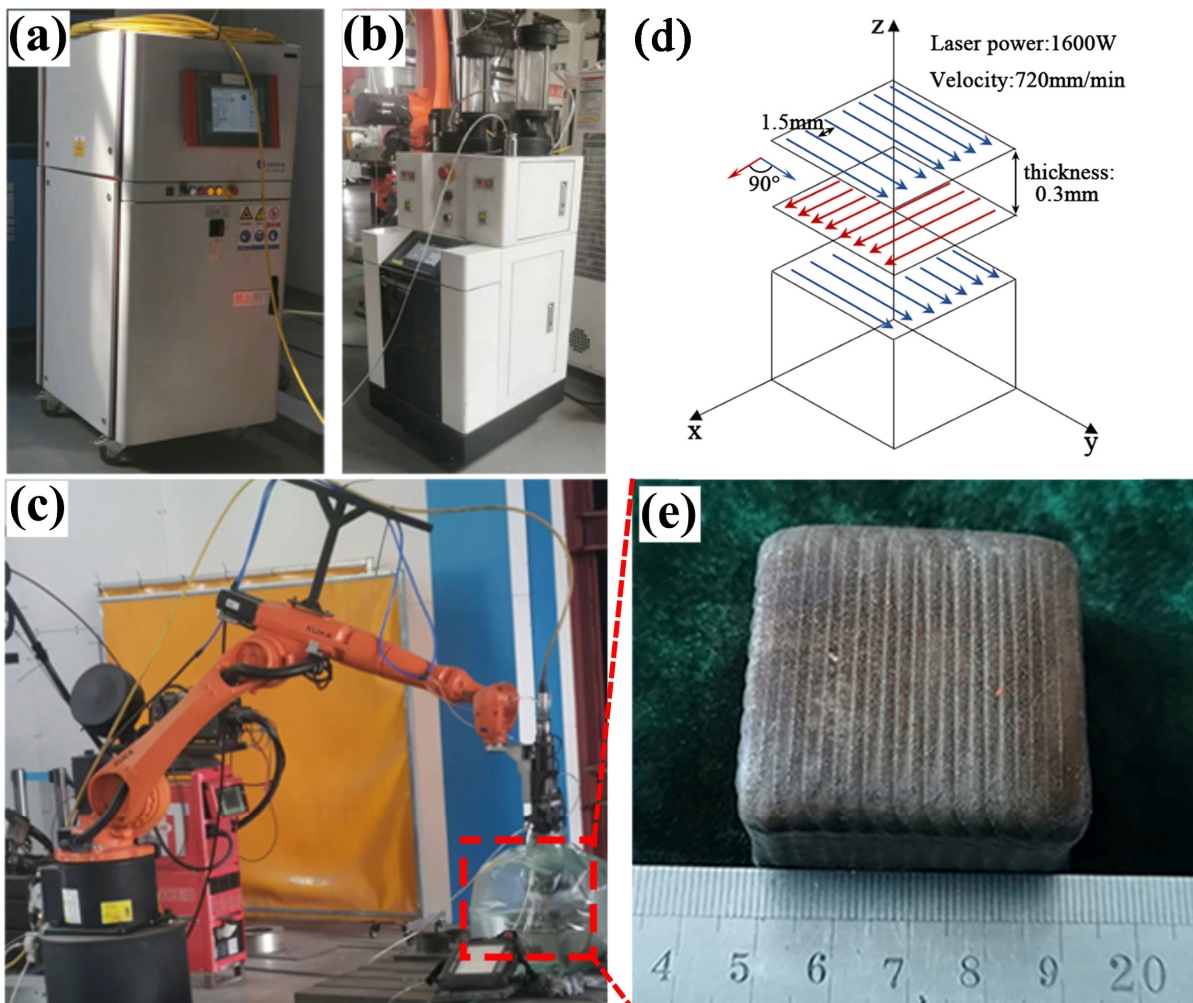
Schematic of the LMD Printing Process: (a) CNC machine; (b) powder feeder; (c) laser head; (d) LMD print; (e) as-printed specimen.
